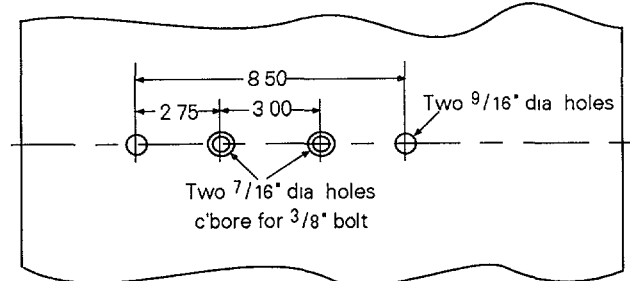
Front of the mounting panel, showing the locations of the mounting holes to be drilled.
